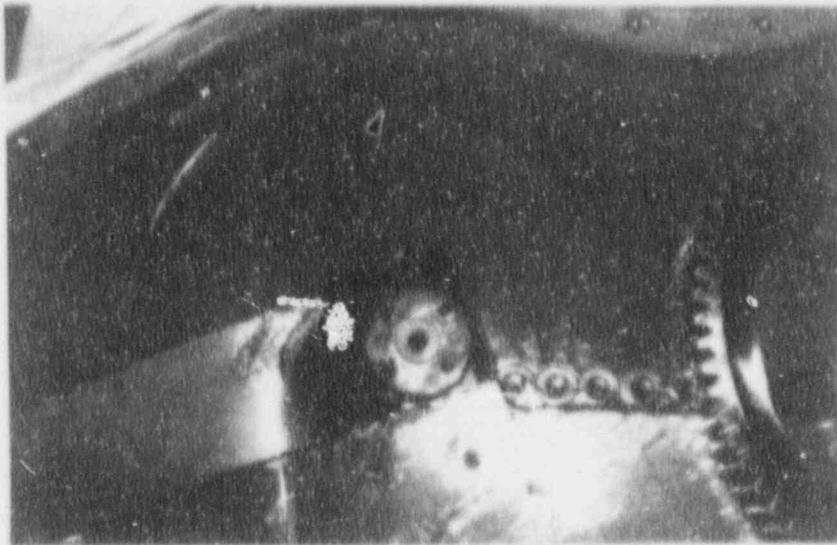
Side view of the left rear end sheet. Note, the arrow shows where the camshaft gear contacted the camshaft gear housing just prior to the bracket detaching from the end sheet, and after the bracket detached from the end sheet.
